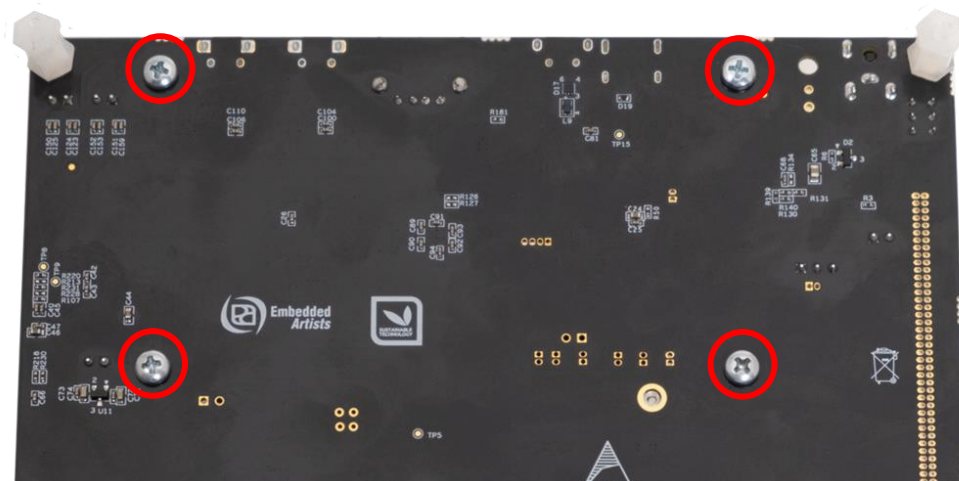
Screws for LCD Mounts on Bottom Side of uCOM Carrier Board
